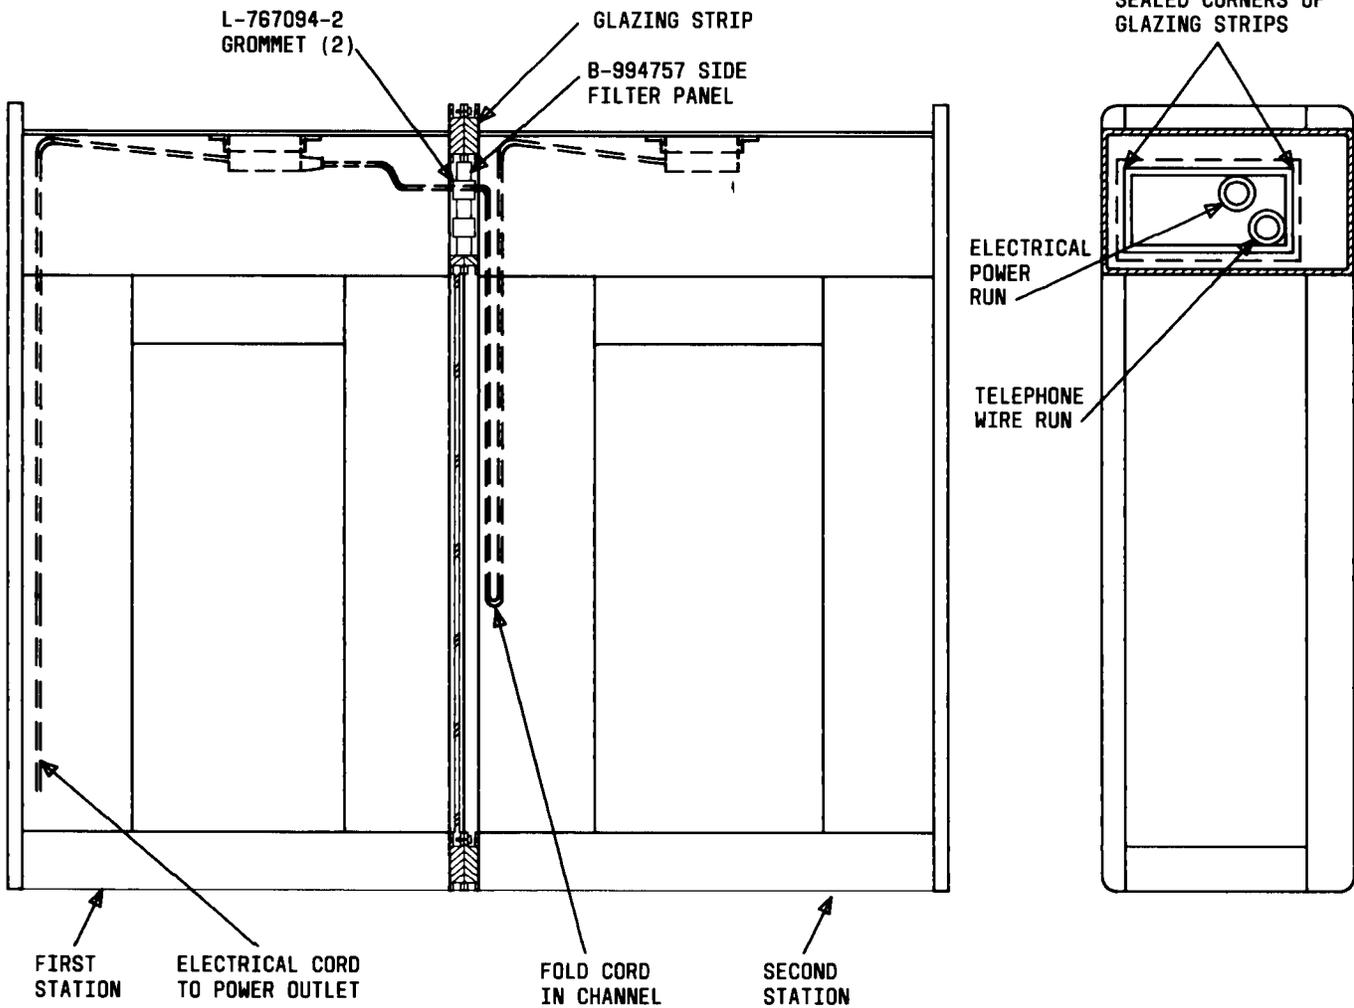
Installation of Two List 35A Housing Assemblies Side-by-Side Using List 74 Mounting Kit
